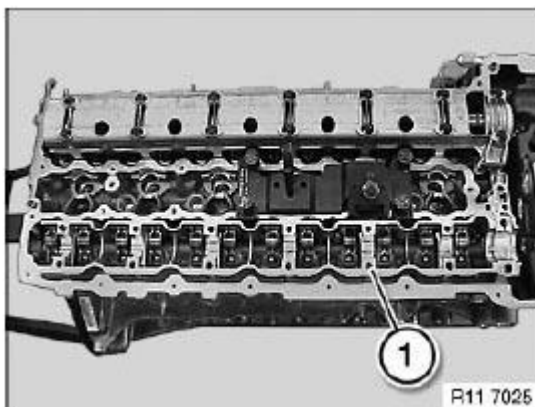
Identifying Cylinder Head Lower Bearing Strip
